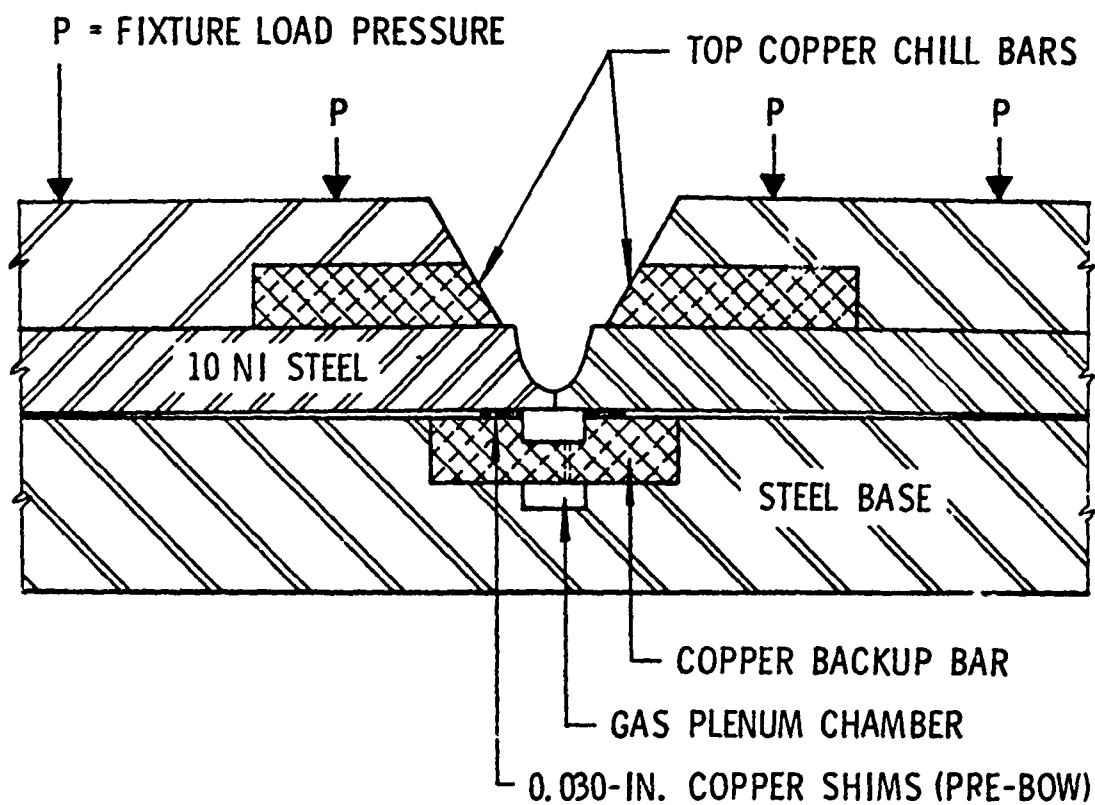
SECTION OF GTA WELD FIXTURE
